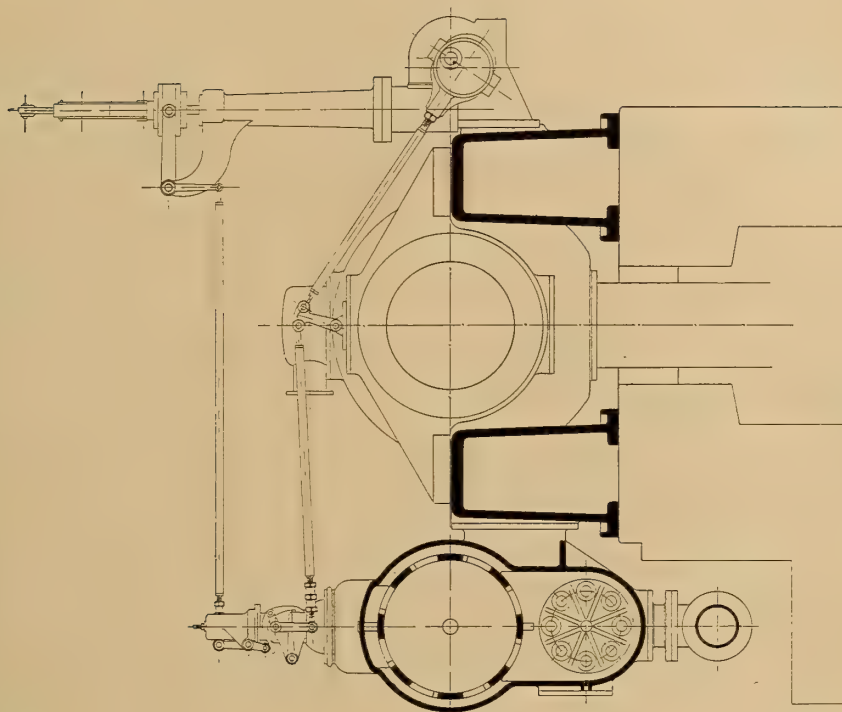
TRANSVERSE VIEW OF GOVERNOR, TRIP GEAR, PUMPS, AND CYLINDER ON DE LA VERGNE KOERTING ENGINE
